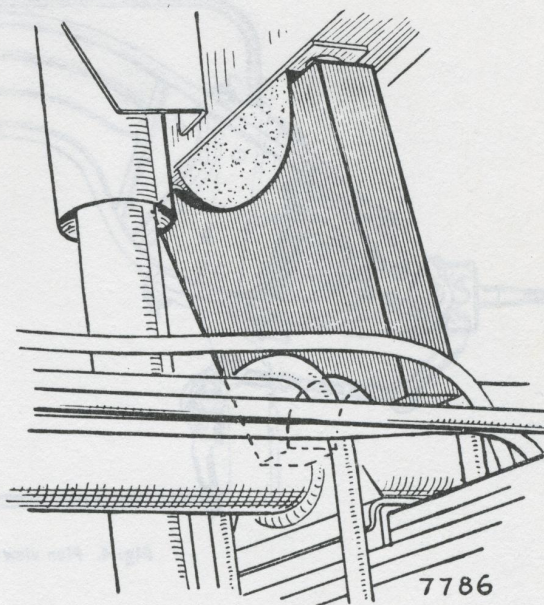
Rear gap gauge in position, ensure that the rear bottom corner is clear of the hydraulic pressure pipes
